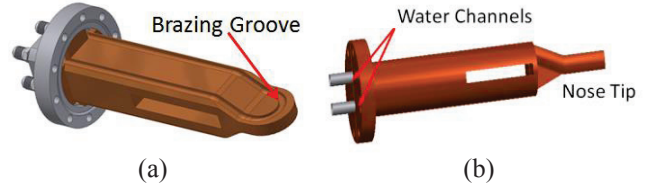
NSLS-II crotch absorber, (a) existing brazed - GlidCop design, (b) new single piece CuCrZr design.
